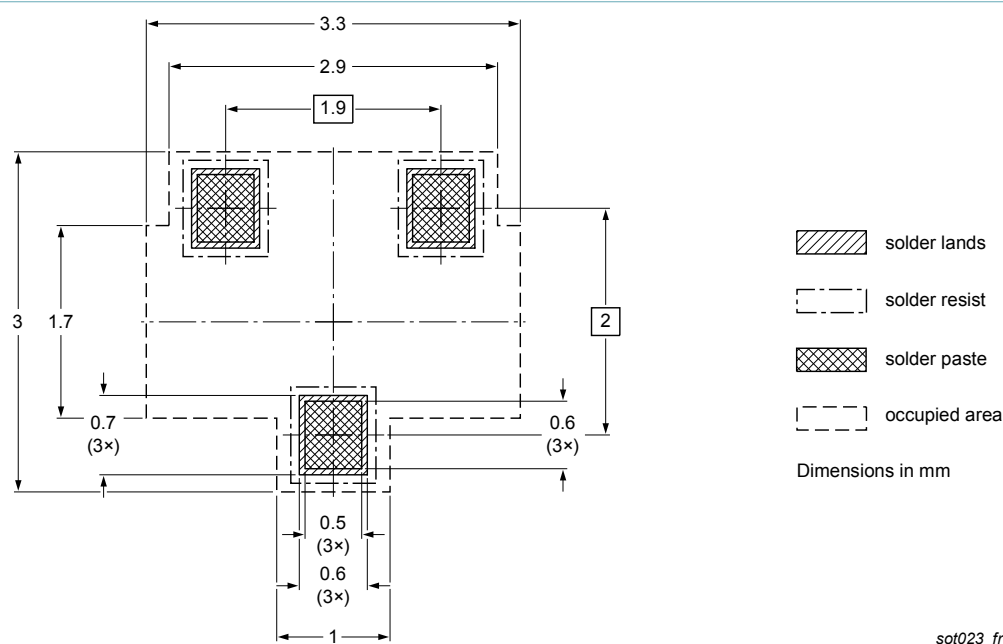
Reflow soldering footprint for SOT23 (TO-236AB)
